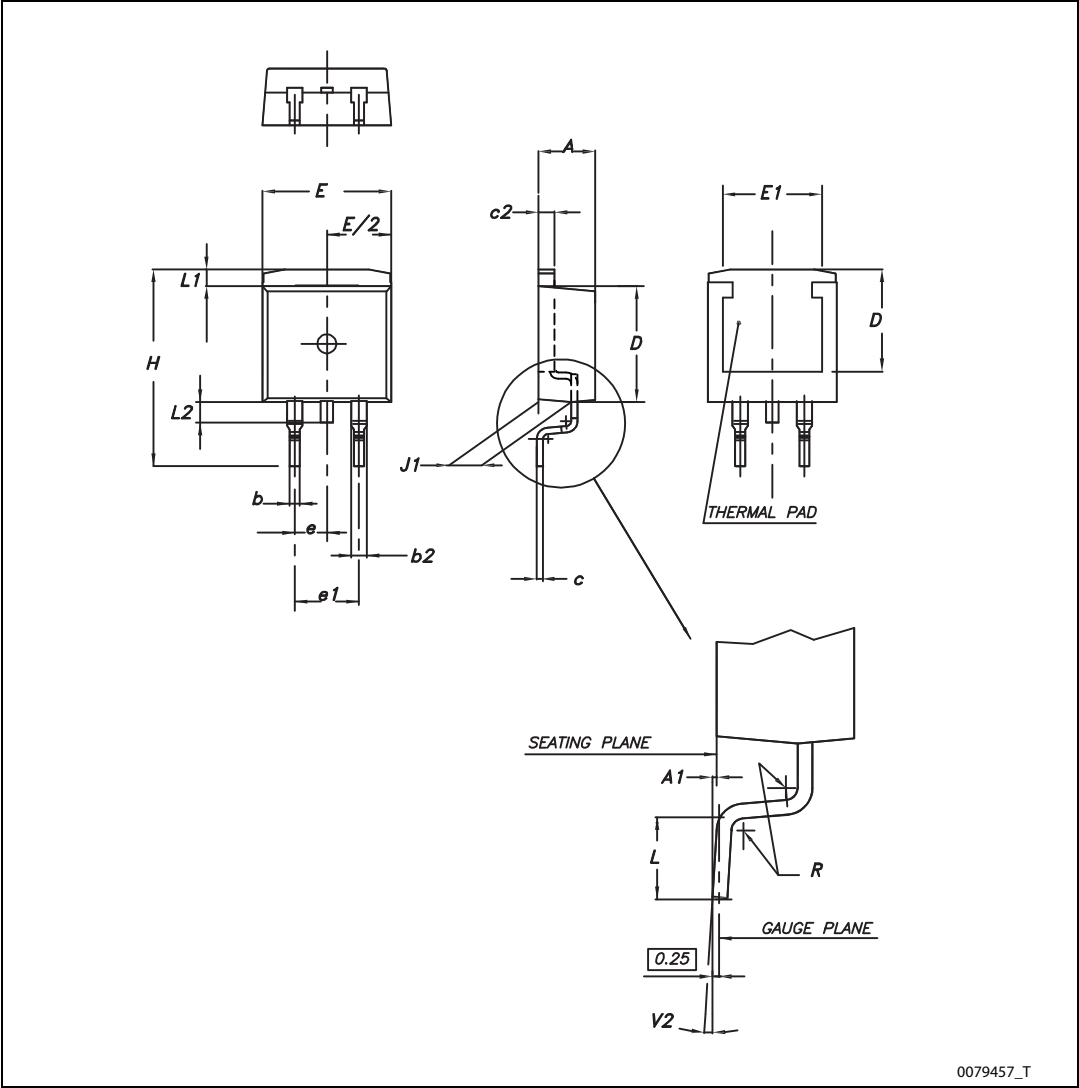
D²PAK (SMD 2L STD-ST) type A drawing
